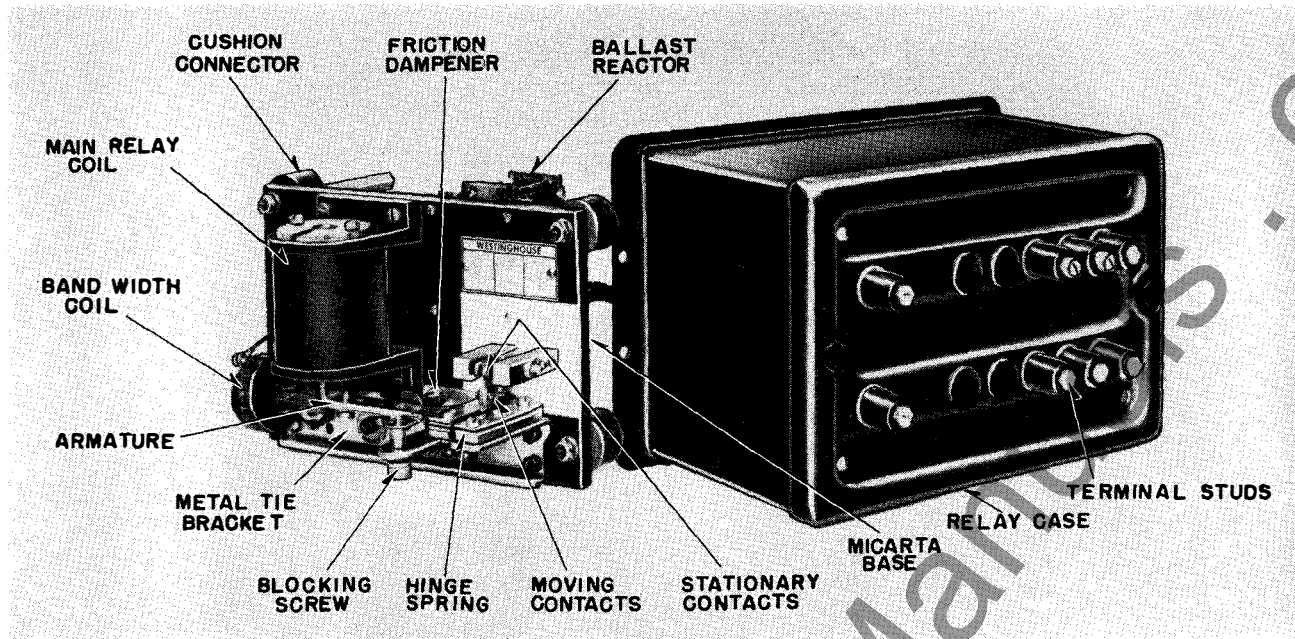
Front View of SJS Relay Element Assembly and Rear View of Case
